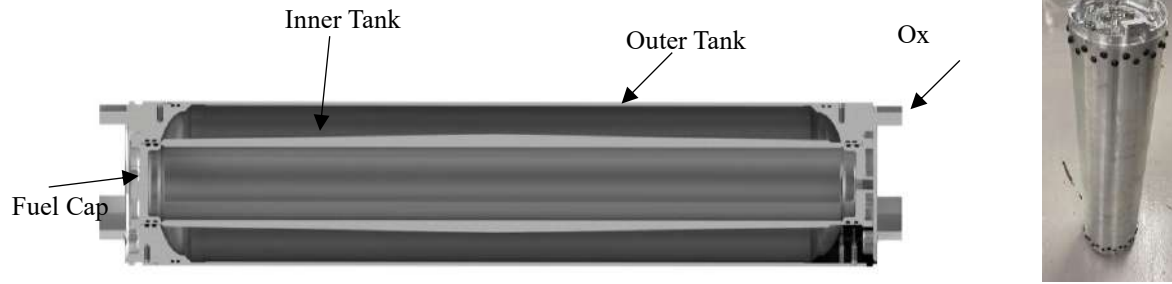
Left: Half-section view of the full tank assembly Right: A picture of the assembled tank
